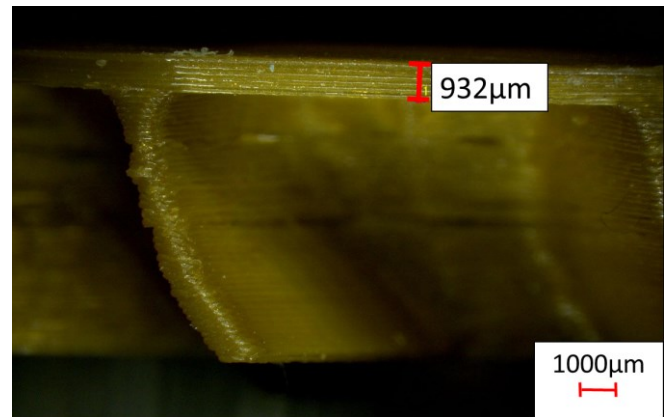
Sideview blade inspection showing the measurement procedure and layering morphology inspection (Scale bar: 1000 µm).
